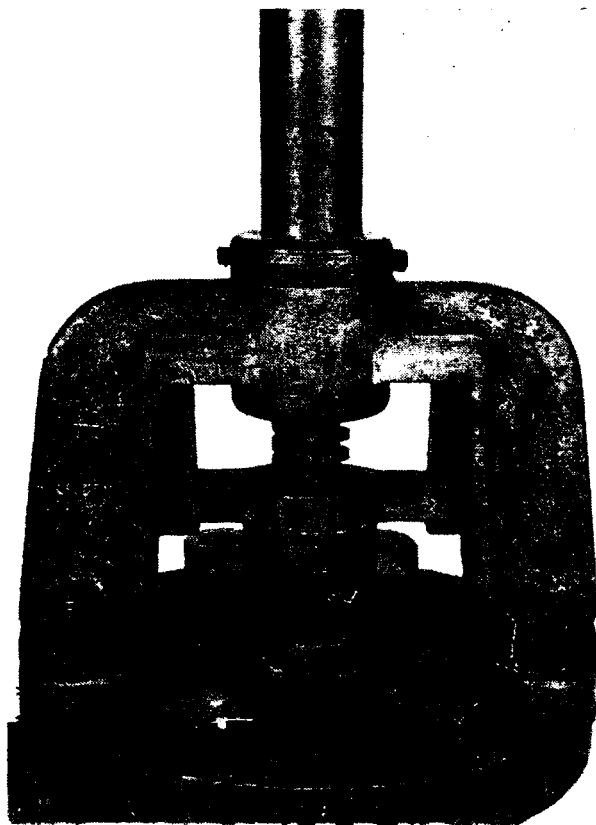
BONNET OF ADMIRALTY TYPE VALVE SHOWING BRIDGE COVER PLATE AND GLAND WITH EXPOSED SPINDLE THREADS. COMPARE WITH SINGLE INTEGRAL CASTING OF R.A.N. VALVE IN FIG. 5
